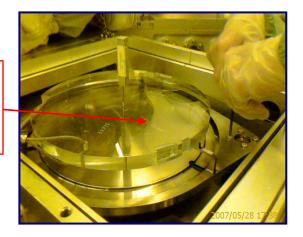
& 55: Aligning cool ring to Degas Heater using AMAT's alignment fixture
